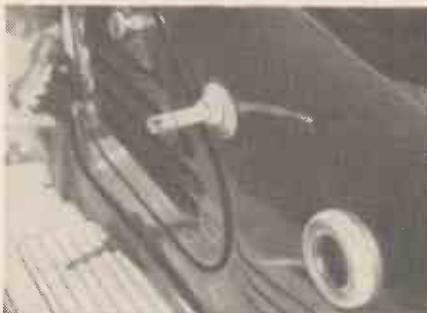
The petrol tap rod must be pushed outward through the body.
